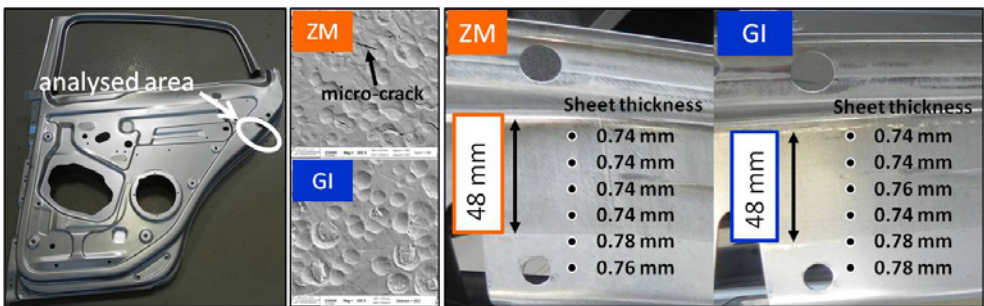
, left: door inner trial part; mid: SEM image of ZM and GI coating; right: sheet thickness thinning and contact length.
